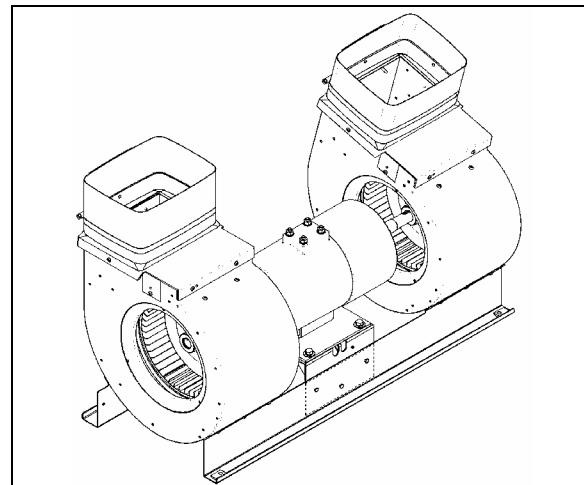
EVAPORATOR MOTOR ASSEMBLY 22316
